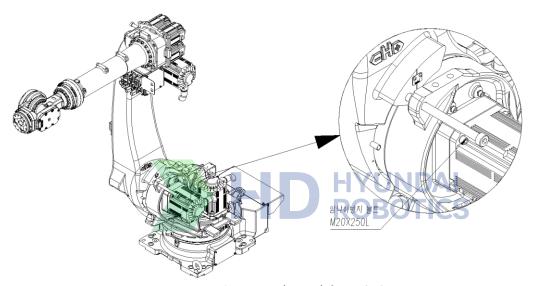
1 Arm (H axis) fixing bolt insertion position
